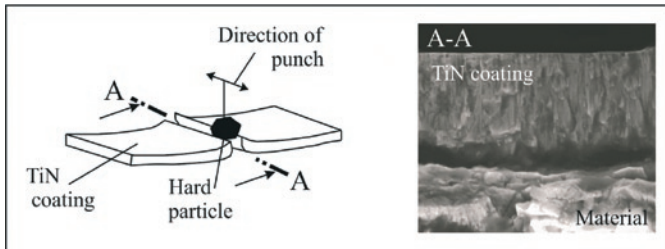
Delamination between coating and surface caused by the hard inclusion in the sheared blank material
